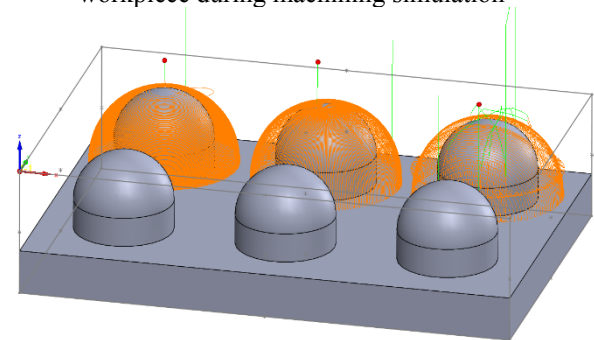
Toolpaths for 5-axis milling. From the left : Constant-Z, Radial and Linear
